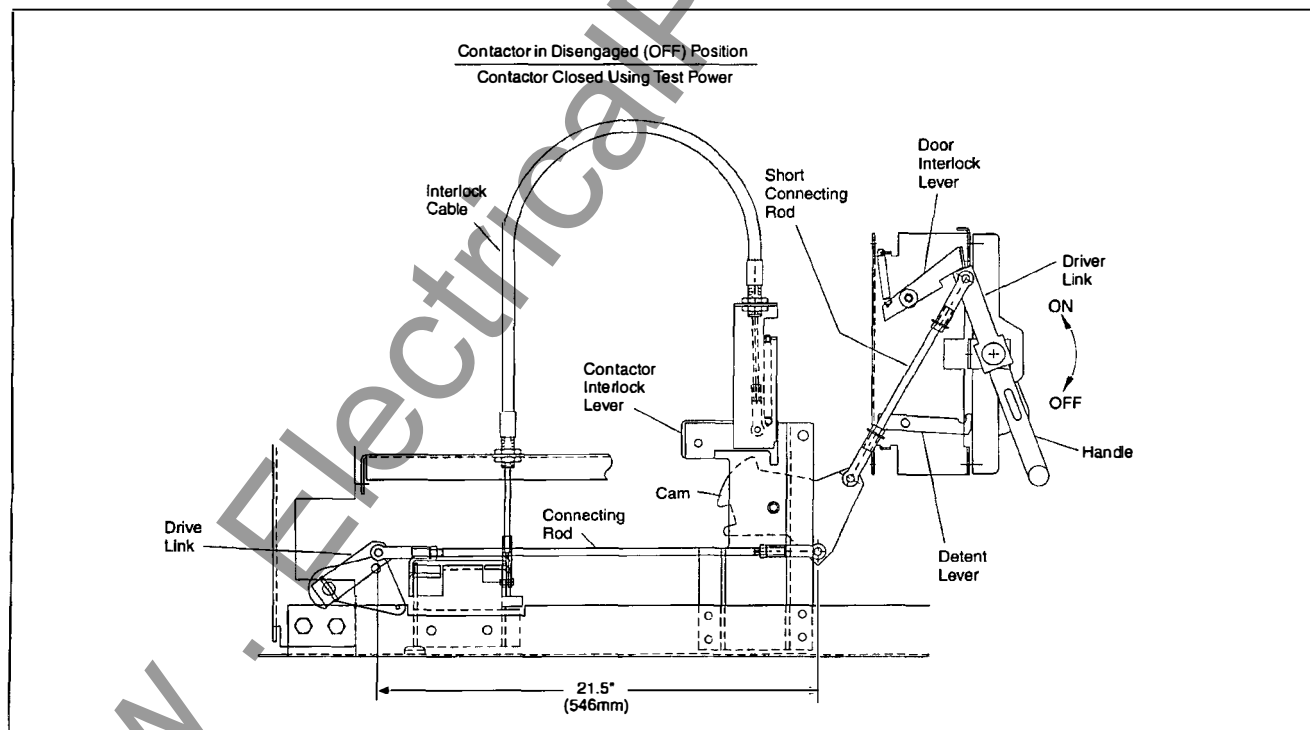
97H3 Racking Mechanism - Handle in OFF Position (Directly Actuated Interlock)
